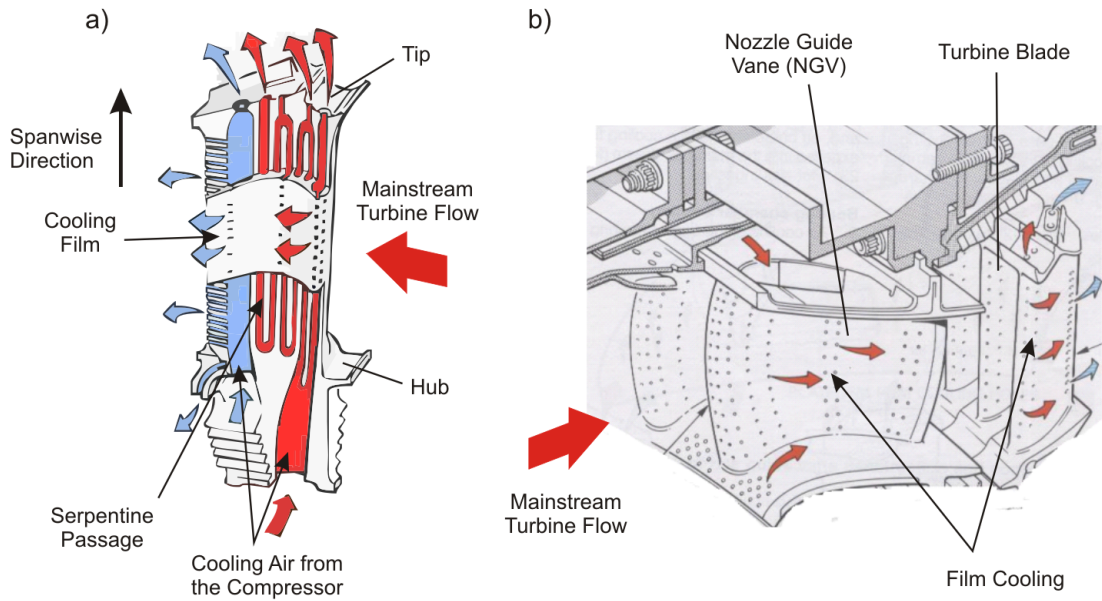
Film cooling on a high pressure turbine stage, (a) part cut-away view of a blade and (b) exterior view of an NGV and a blade, adapted from Rolls-Royce [85].
